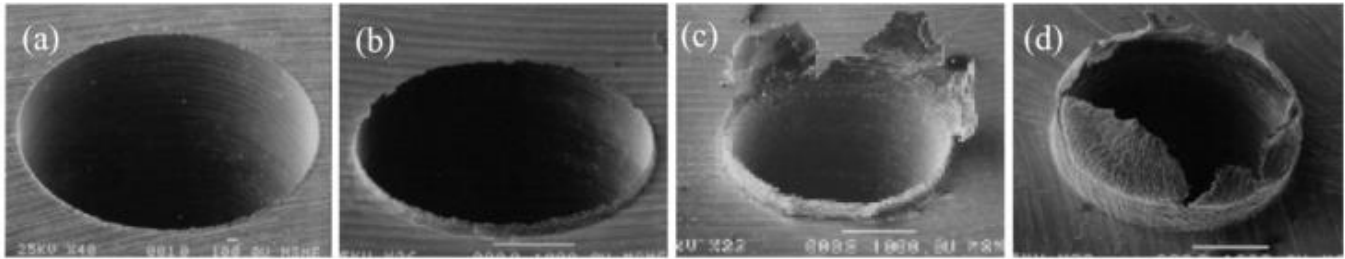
Types of burrs in micro drilling (a) virtually burr free (b) uniform burr, (c) transient burr, (d) crown burr [18]
